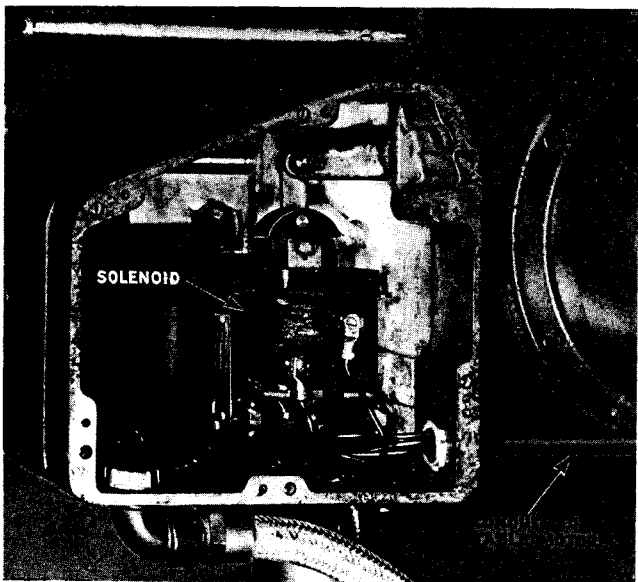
Solenoid in knee compartment (cover removed). Solenoid is energized while spindle motor magnetic switch is closed. When the motor is stopped, spring in feed case brings linkage to position shown.
